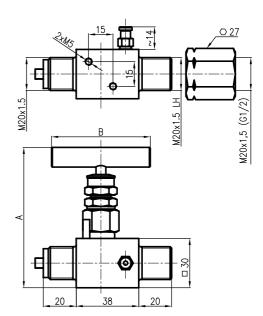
MANOMETRIC TESTING VALVE 967 51 .., dimensional drawing, scheme, application
